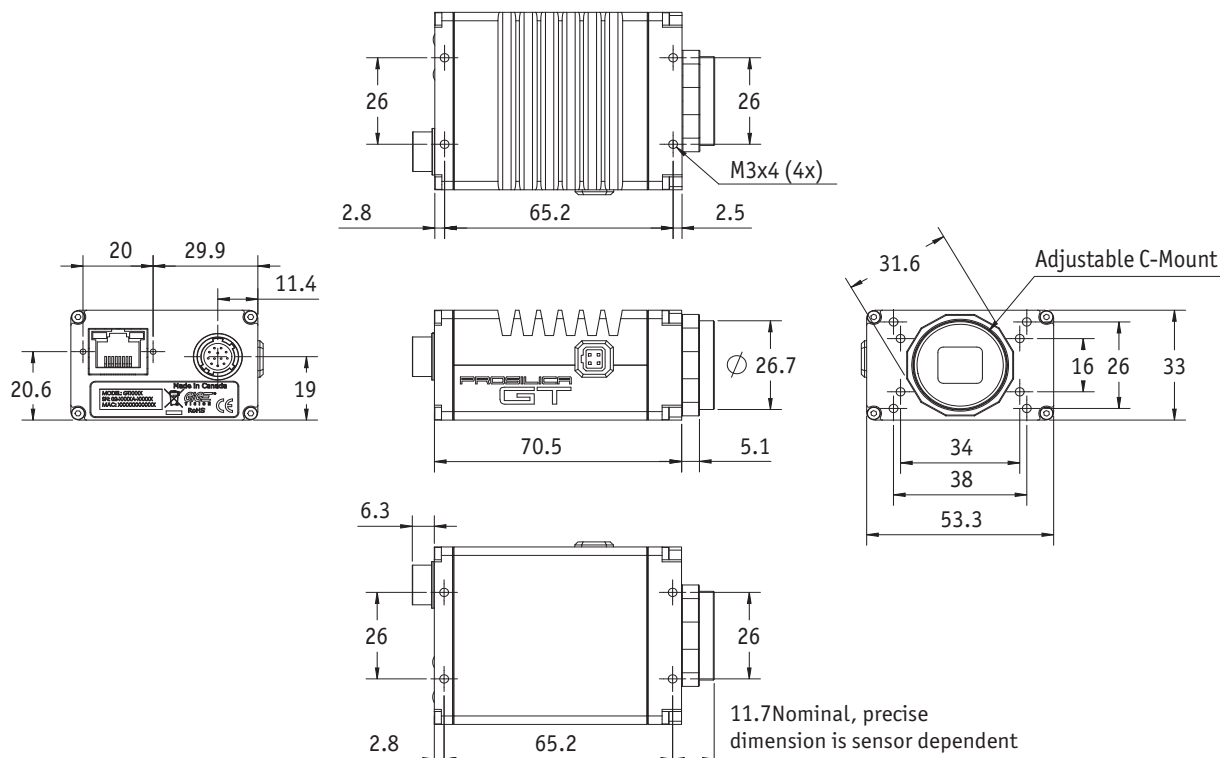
Mechanical dimensions for C-Mount Prosilica GT standard cameras
